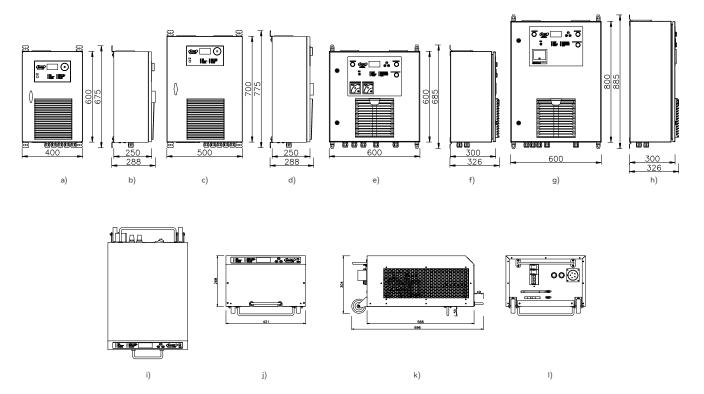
Views with the dimensions of the PBI type rectifier compact (wall-mounted and portable enclosure):
